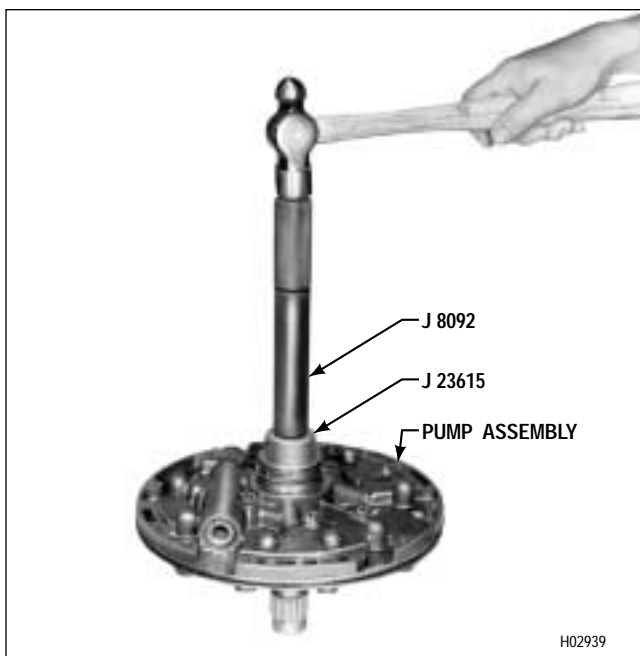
Installing Stator Shaft Rear Bearing (Models without Lockup)
